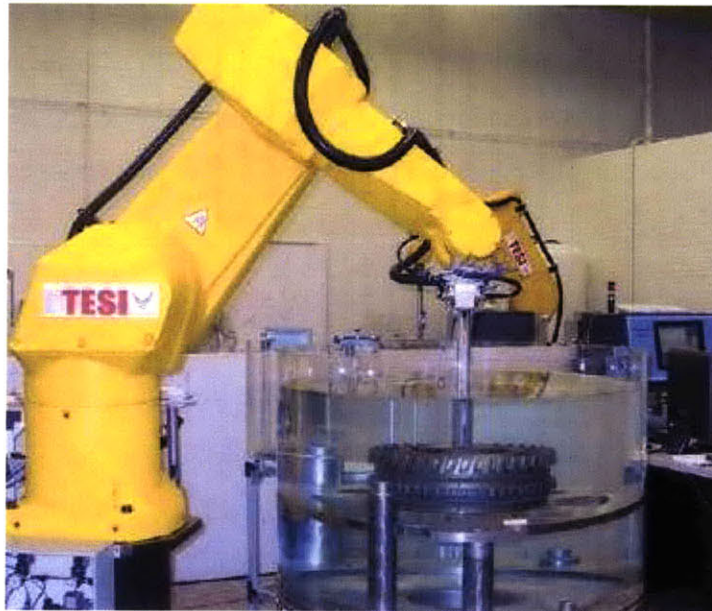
The fully automated TESI inspection system at UDRI showing the robot manipulator and inspection tank (reprinted from[100])
